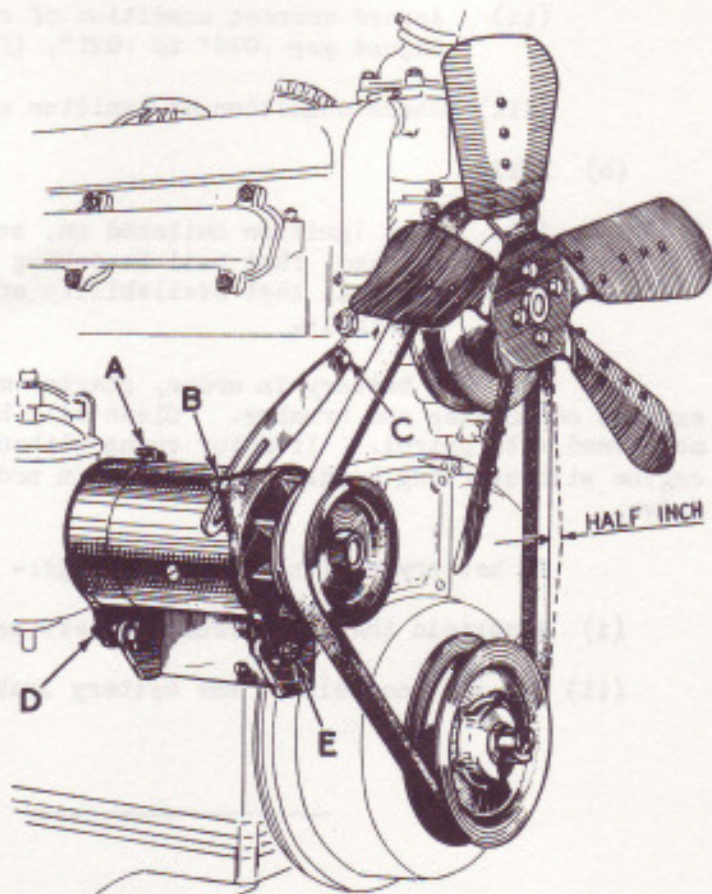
DYNAMO AND "VEE" BELT DRIVE.
